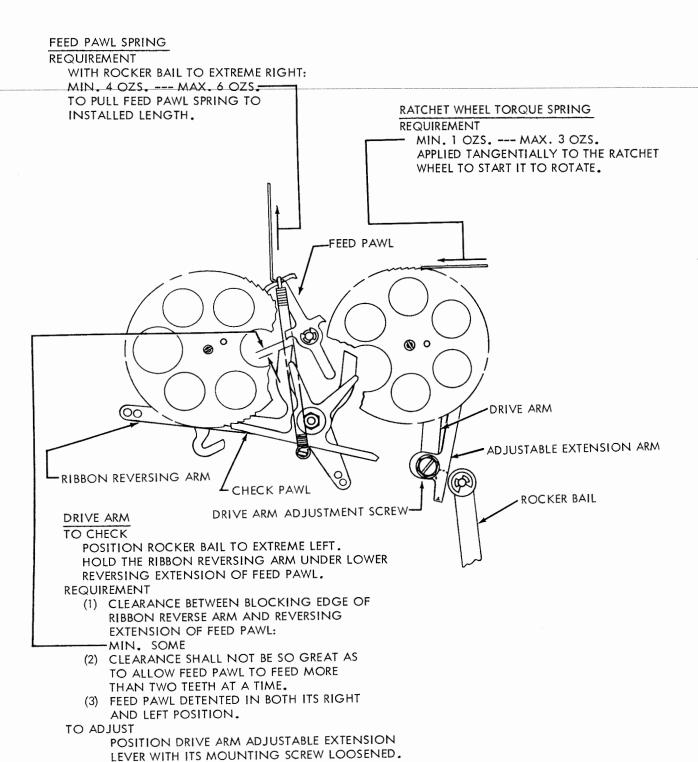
E. TYPING REPERFORATOR TT-373/UG, TT-375/UG, RIBBON FEED MECHANISM - LATEST DESIGN
